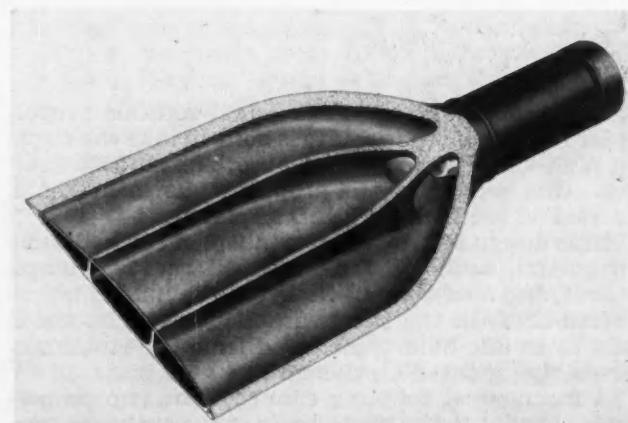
Cutaway of propeller blade. This is the thrust member of the two-part blade. The other component, of alloy steel sheet, is brazed to this forged part
